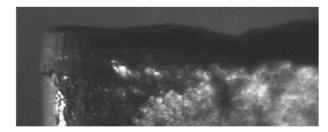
Final tool wear, WPP20S, 100 m·min⁻¹
